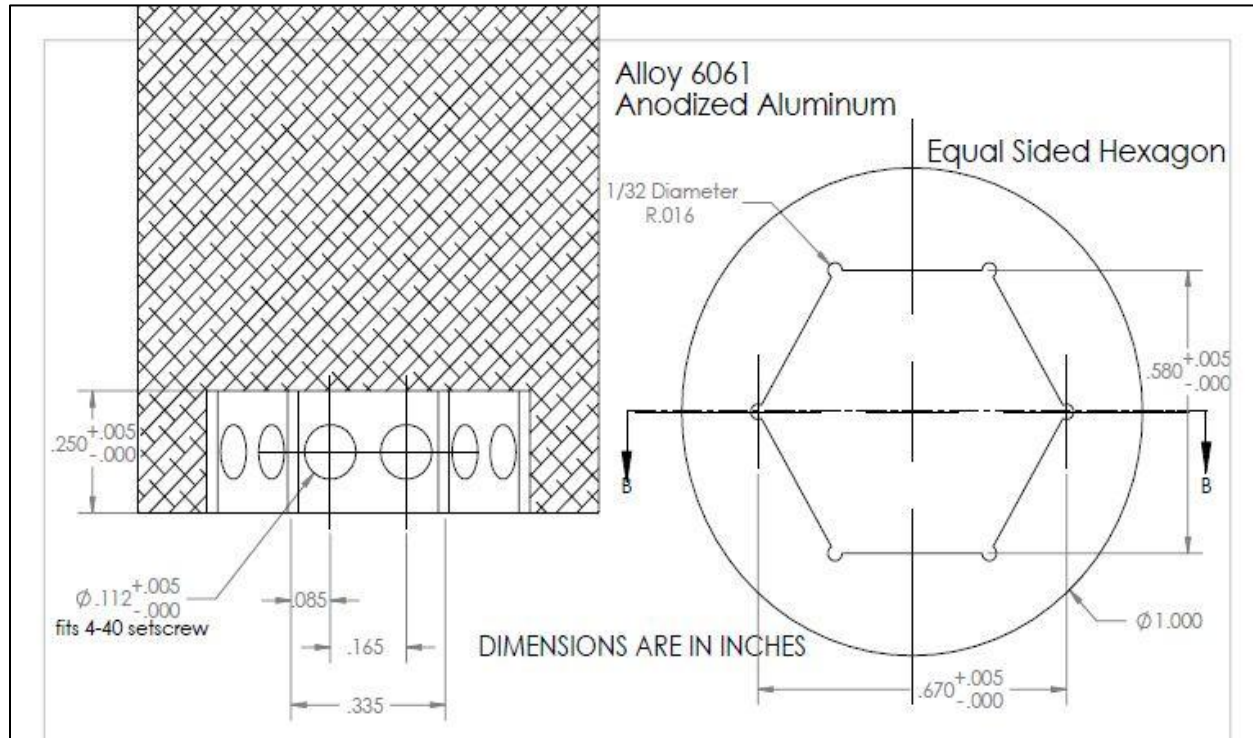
Hexagonal Pocket and Setscrews Dimensions with Tolerances
